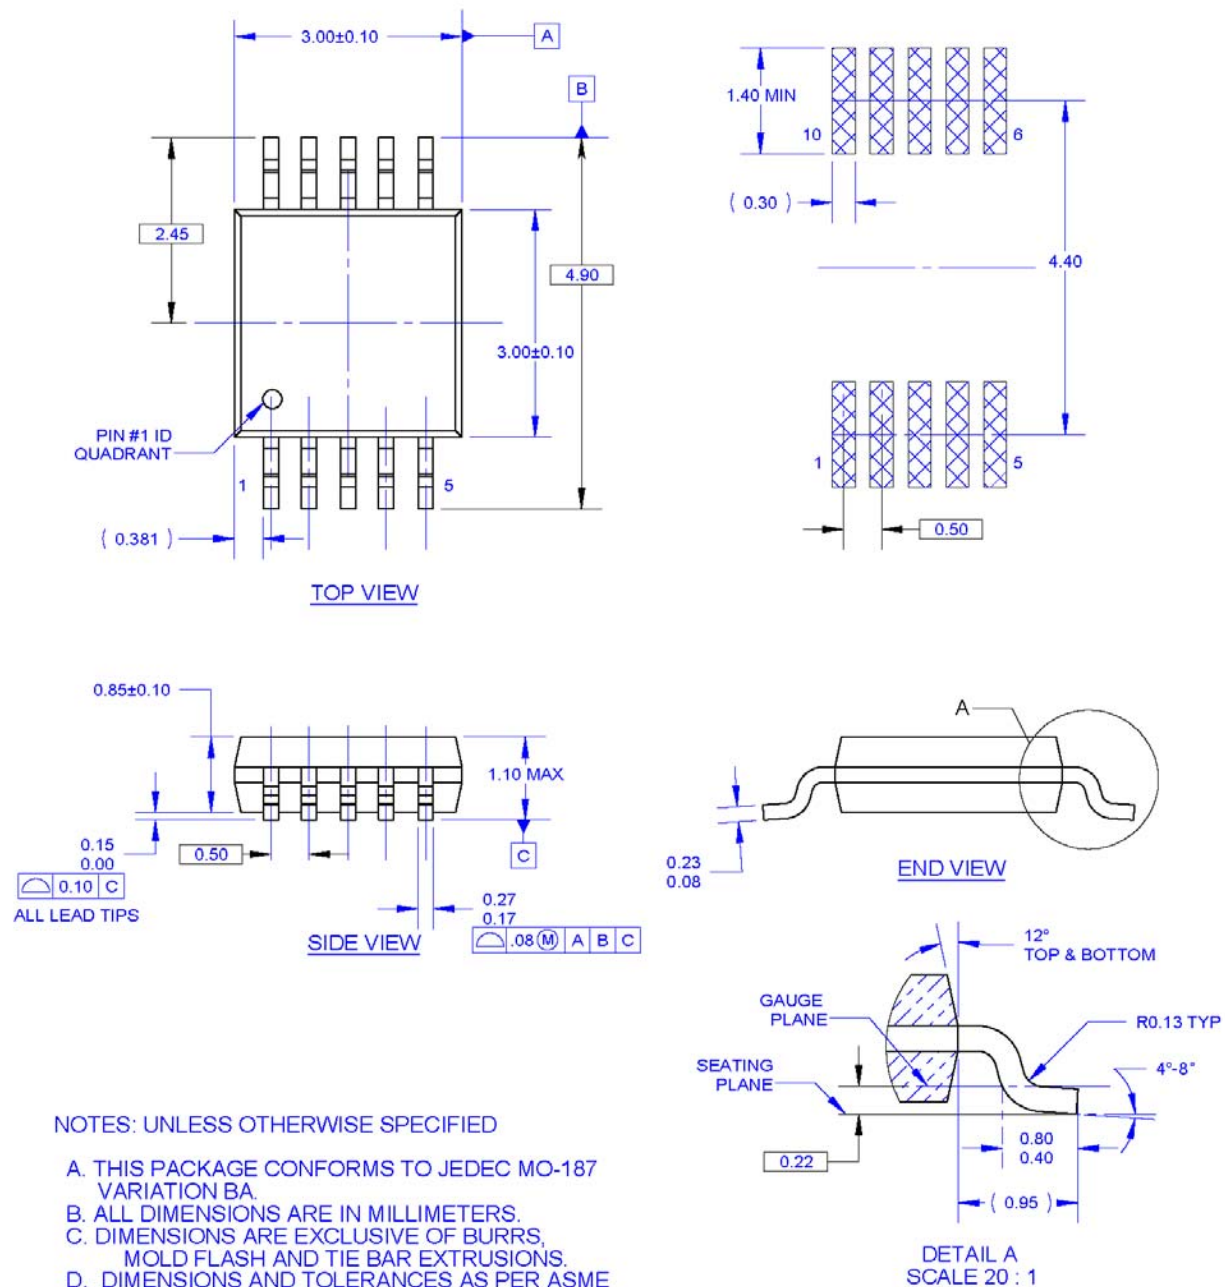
10-Lead Molded Small Outline Package (MSOP), JEDEC MO-187, 3.0mm Wide
